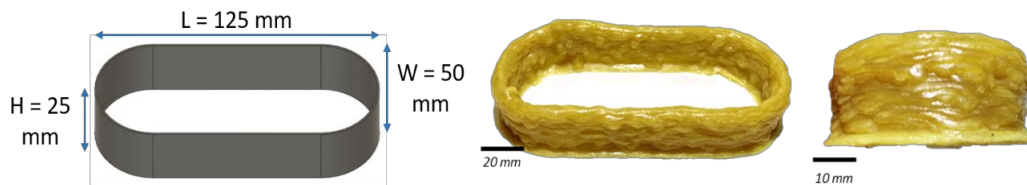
(Left) Targeted single layer ovular print geometry. (Middle) Aerial view of 2.5 wt% FS PU printed specimen according to left geometry. (Right) Front view of 2.5 wt% FS PU specimen printed according to targeted dimensions. Significant “drips” indicated material did not have sufficient initial viscosity to prevent dripping and flowing upon deposition, despite 2.5 wt% FS PUs displaying the fastest gelation time observed rheologically.
